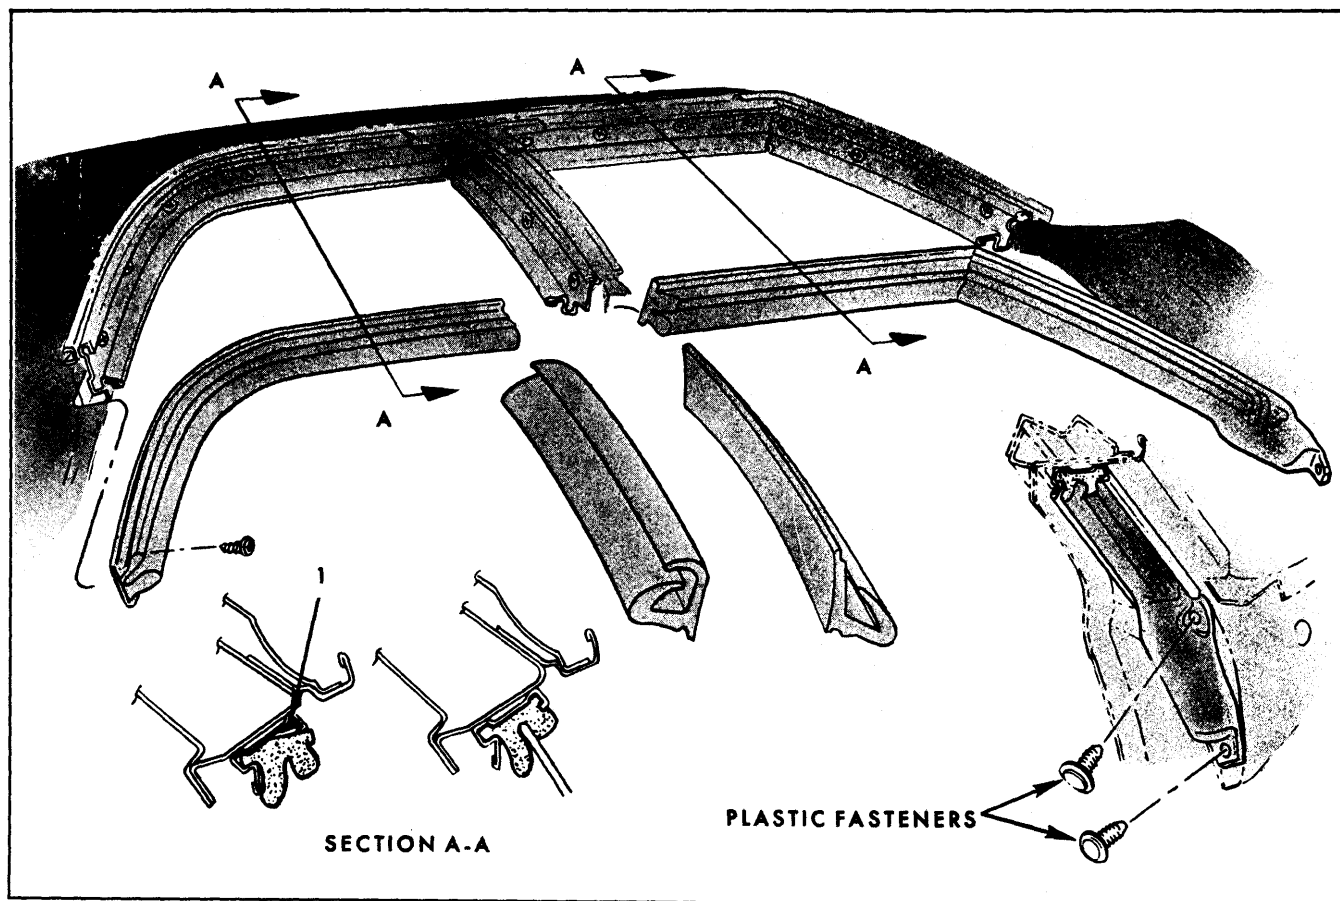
Side Roof Rail and Center Pillar Weatherstrip
